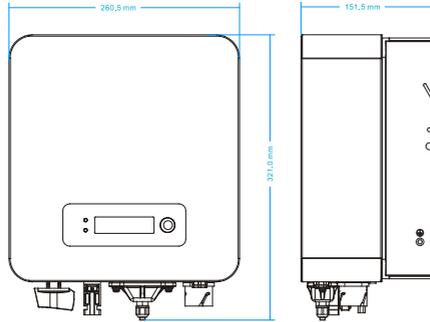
Front view and left view dimensions of SOFAR 4KTL2-G3
